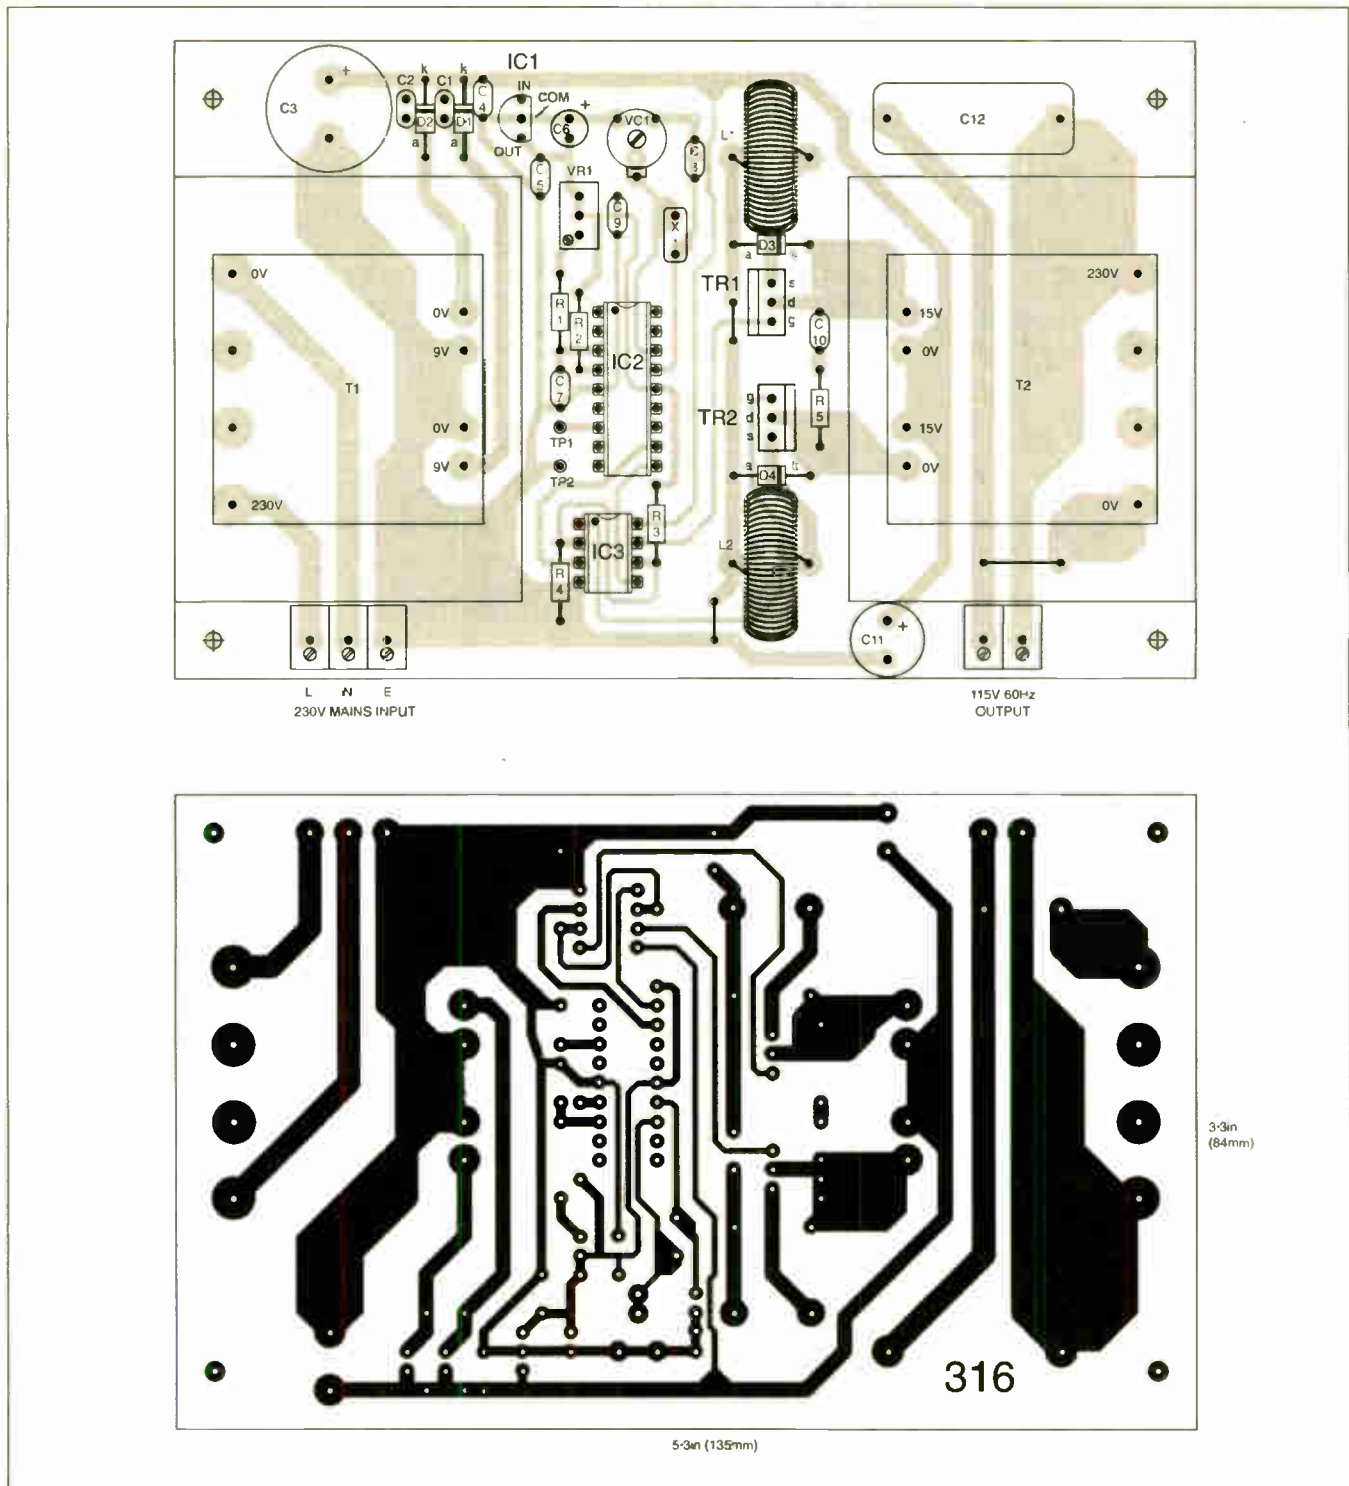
Printed circuit board component layout and full size copper foil master track pattern for the Synchronous Clock Driver.
